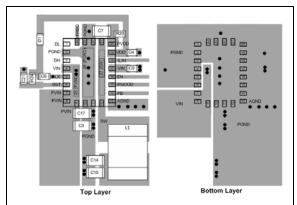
Top and Bottom Layers of a Four-Layer Board.
